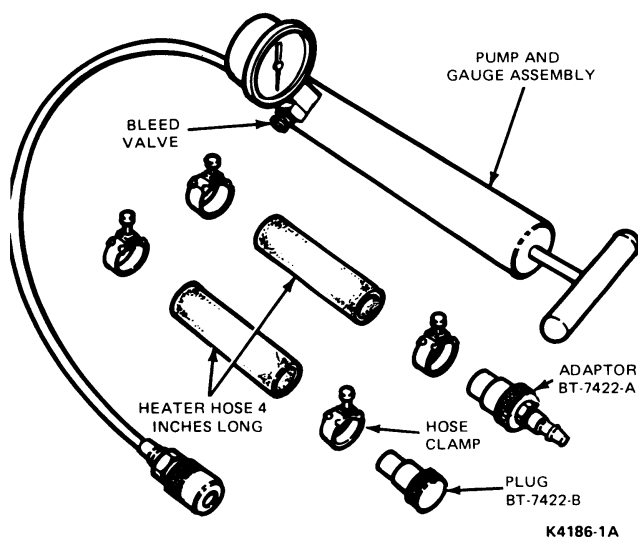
Tool 21-0012 with Heater Hoses and Clamps
